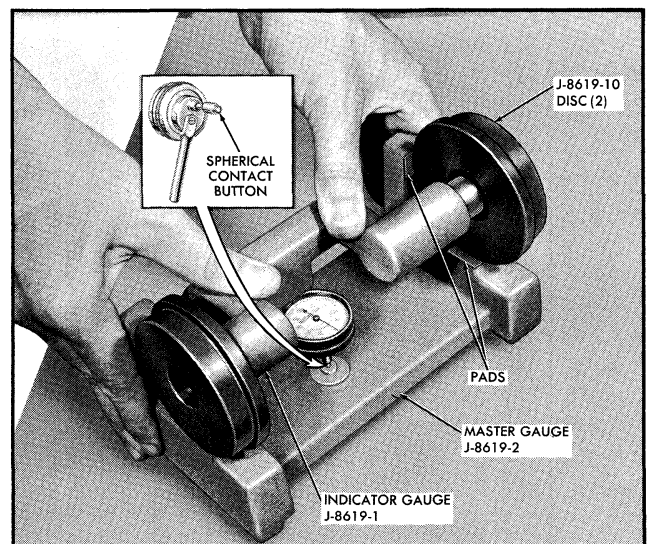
Zeroing Pinion Depth Setting Gauge
